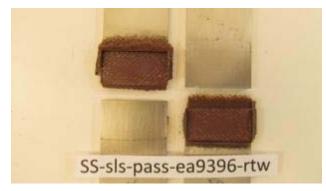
Typical adhesive failure mode of stainless steel AISI 304 (SS) single lap shear specimens bonded without treatment with EA9396 potting compound and tested at room temperate as wet (RTW).
